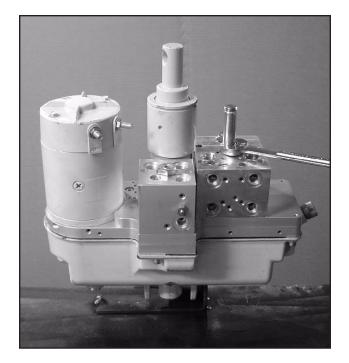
The "S7" Cartridge is removed using a 7/8" wrench or deep well socket.
